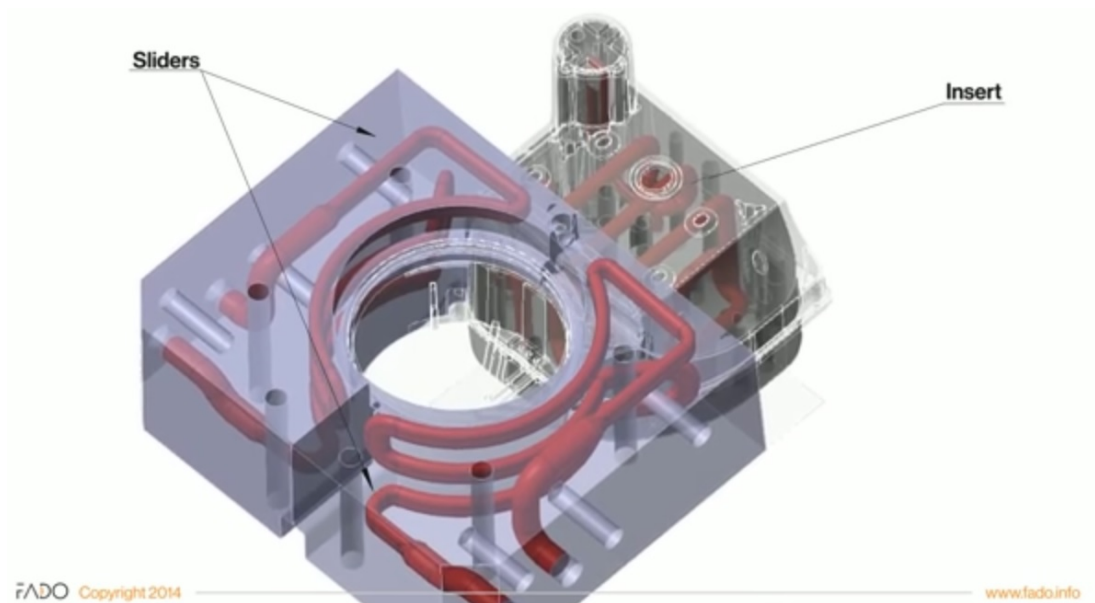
CAD design of the mould showing design features. (<http://www.eos.info/tooling>)
